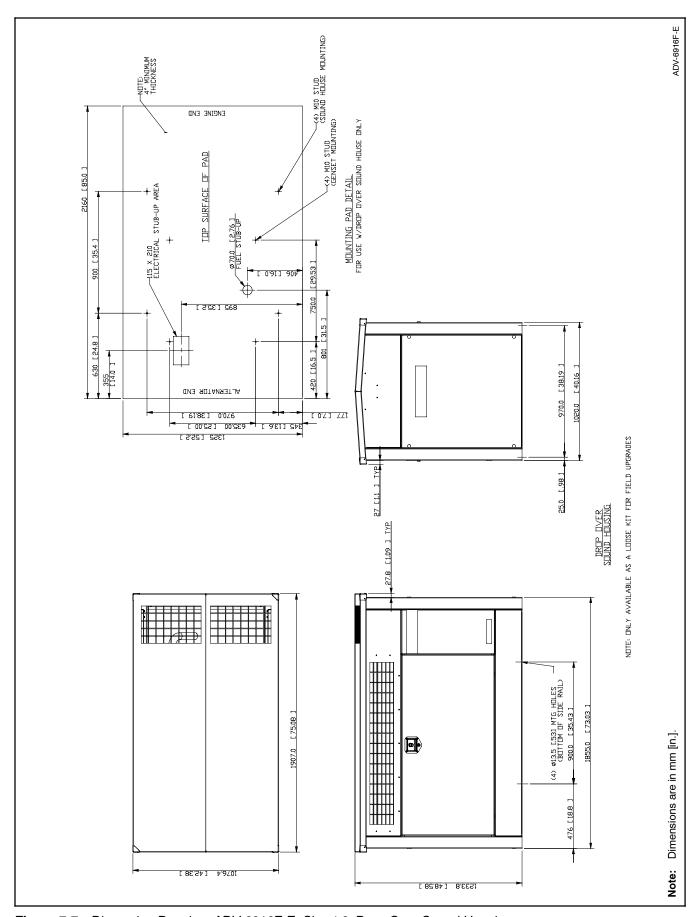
Dimension Drawing, ADV-6916F-E, Sheet 6, Drop-Over Sound Housing
